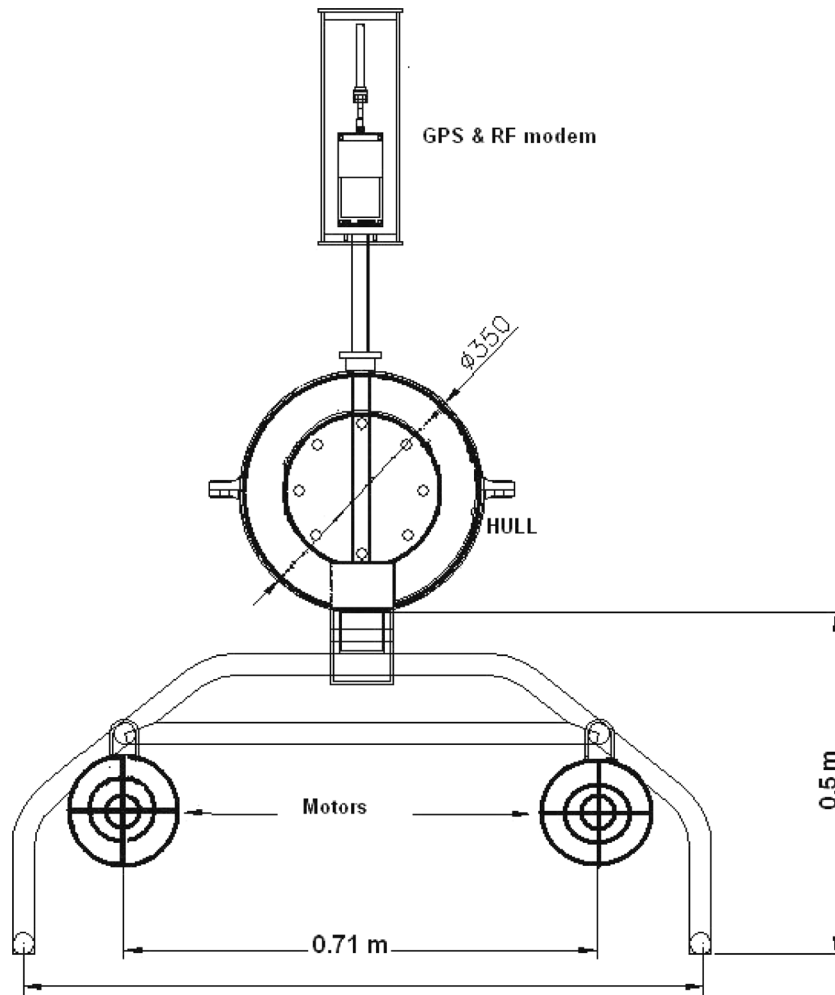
Cross-sectional view of ROSS showing removable motor frame with dual motors attached to the underside of HDPE hull cover.
